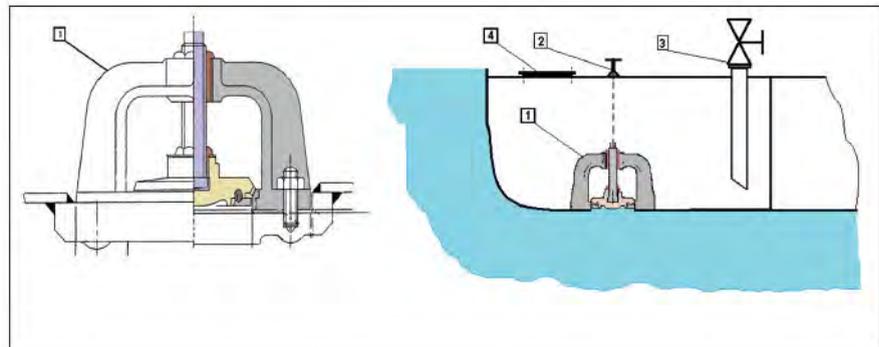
Inlet valve for sea chest. 1 - closed inlet valve of the sea chest; 2 - distance drive with bulkhead seal penetration; 3 - bottom or side valves; 4 - bolted cover of manhole to the sea chest
